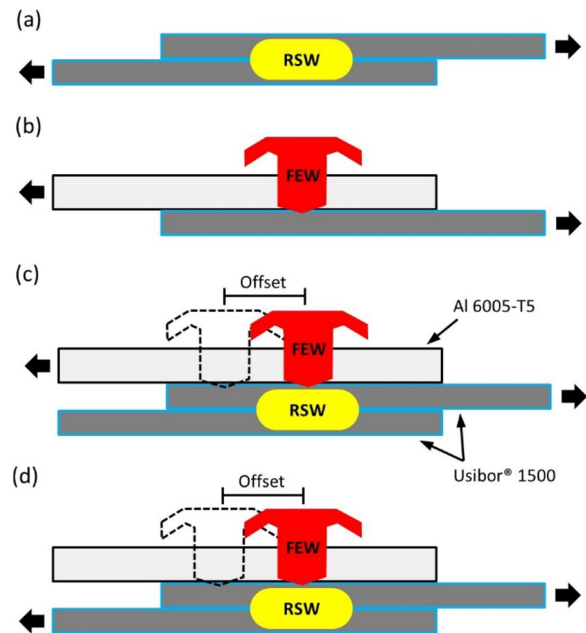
Schematic representation of the tensile shear tests performed: (a) resistance spot welded steel/steel joint; (b) friction element welded aluminum/steel joint; combined resistance spot weld and friction element weld joint to evaluate the effect of the offset distance on the mechanical performance of the (c) friction element welds and (d) resistance spot welds.
